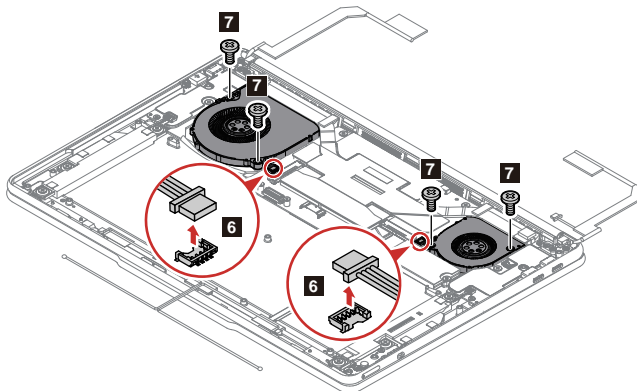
Detach the fan module cables, remove screws and remove the fan modules
